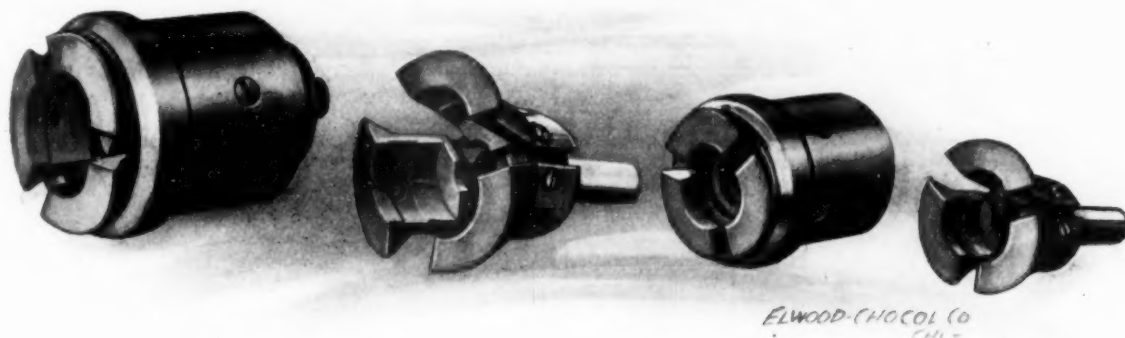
A GROUP OF THREE JAW MASTER HINGE COLLET CHUCKS.
